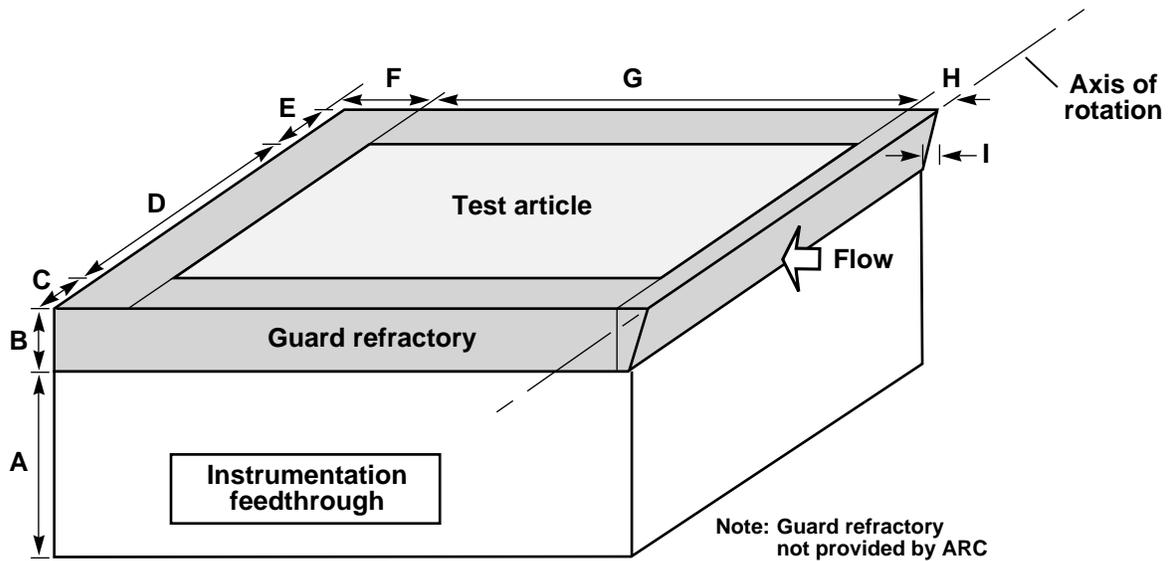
Test fixture assembly for PTF and IHF (semielliptical nozzle) (dimensions are in table 5).
